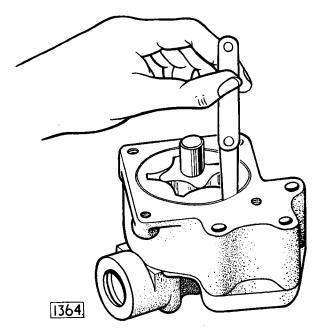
Measuring the clearance between the outer rotor and the pump body.
